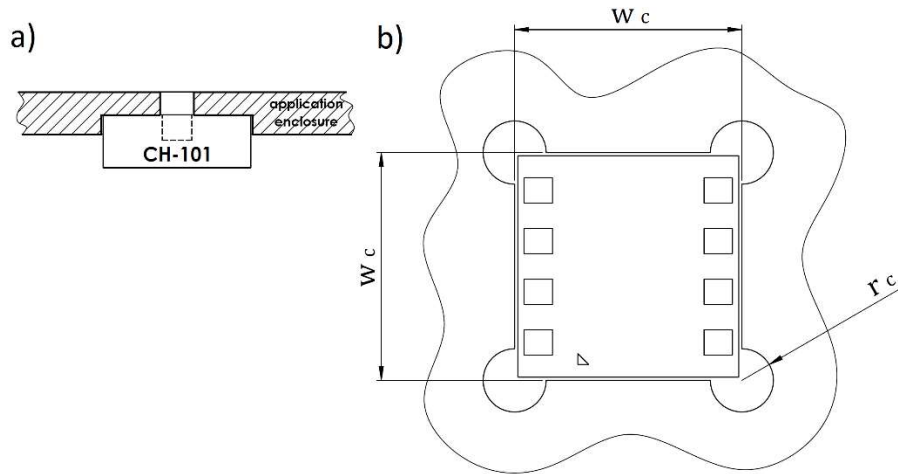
Cavity in the product enclosure for alignment of the CH-101 port to enclosure port shown in a) cross-section and b) bottom view
